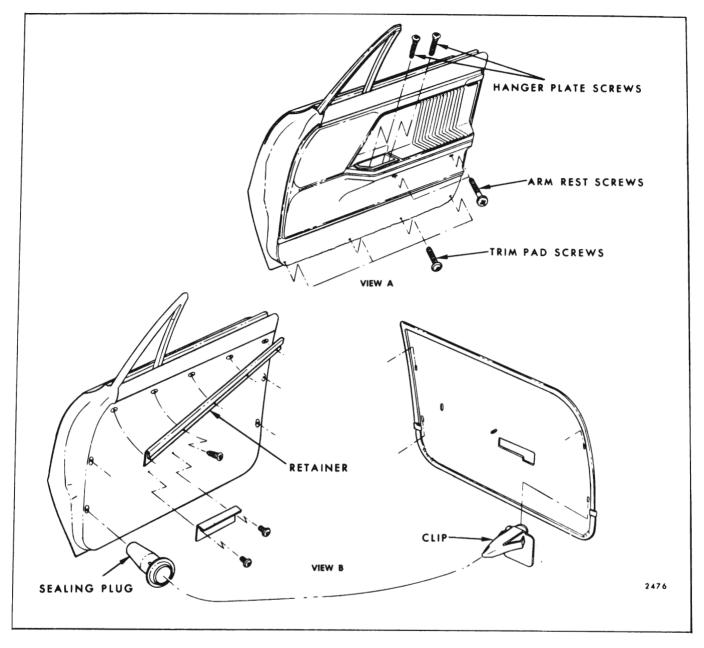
Door Trim Assembly - "F" Body 12600 Series
